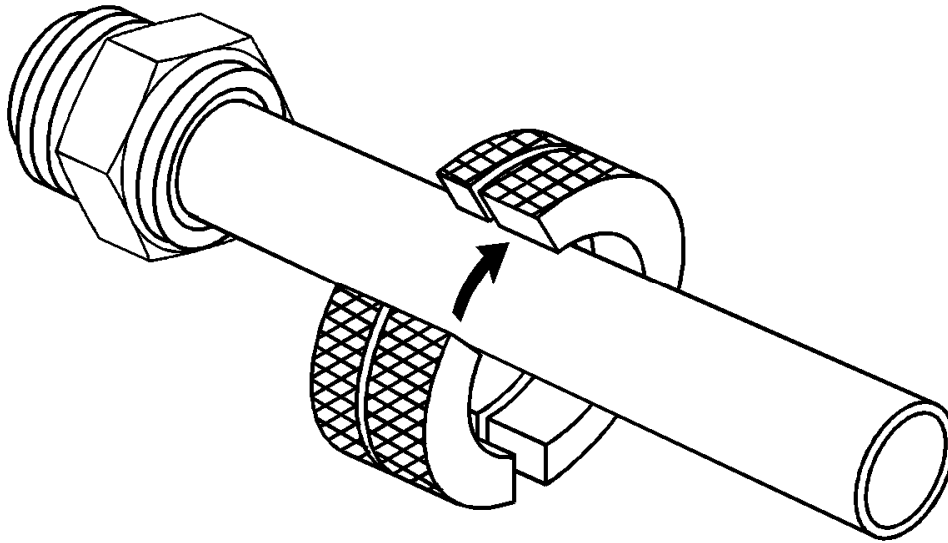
View Of Quick Release Tool & Generator Cooling Inlet Pipe
